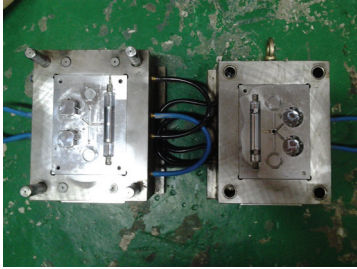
Injection mold of shaft, cap and flange made by polyethylene
